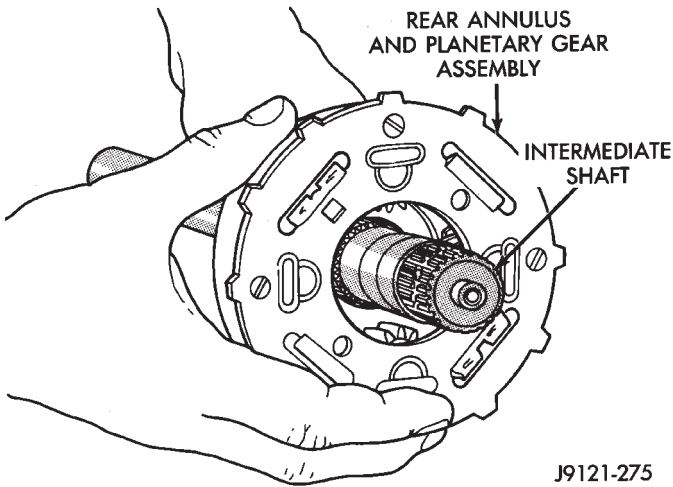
Installing Assembled Rear Annulus And Planetary Gear On Intermediate Shaft
